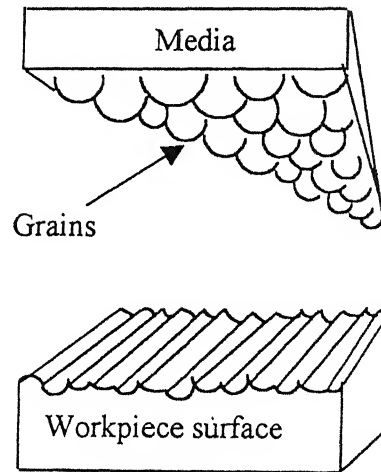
(b) Cross sectional representation of workpiece surface and media
